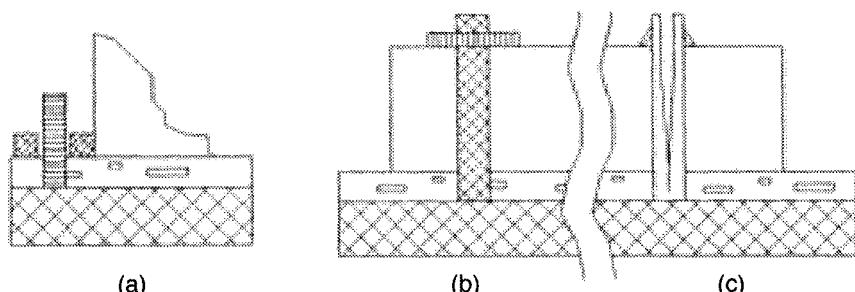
Mounting systems. (a) bolt and bracket, (b) plate and cotter pin, (c) click-in-place assembly can be performed in flight.
